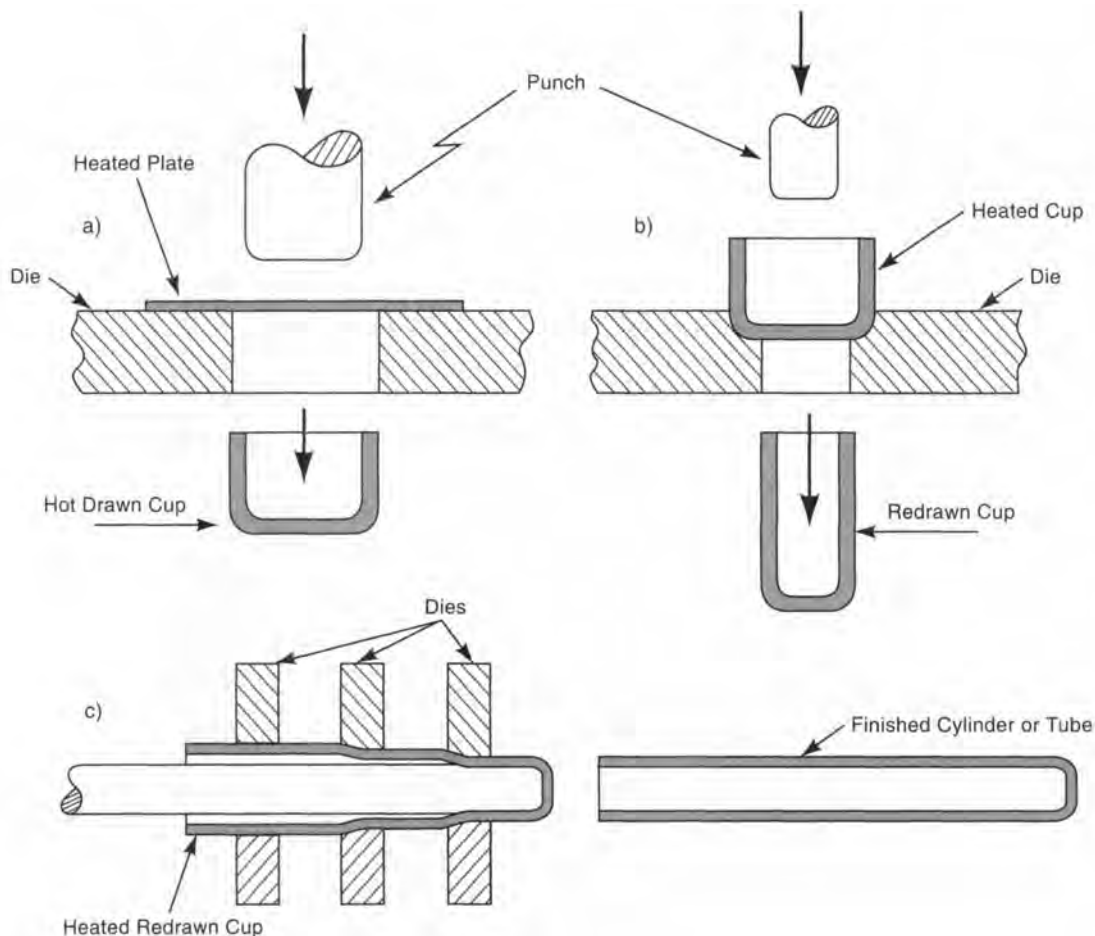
A2 Hot drawing or cupping. a) first draw, b) redraw, c) multiple die redrawing on drawbench.
